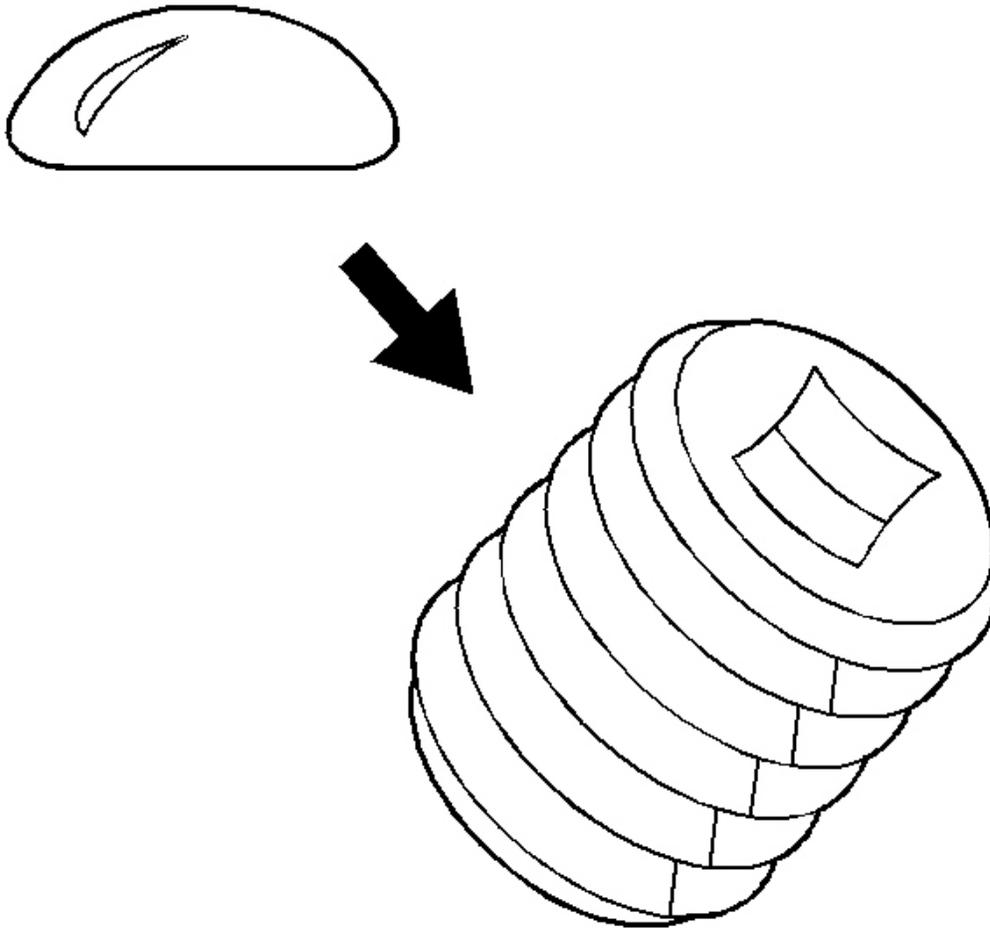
Applying Sealant To Adapter Plate Plug Threads
